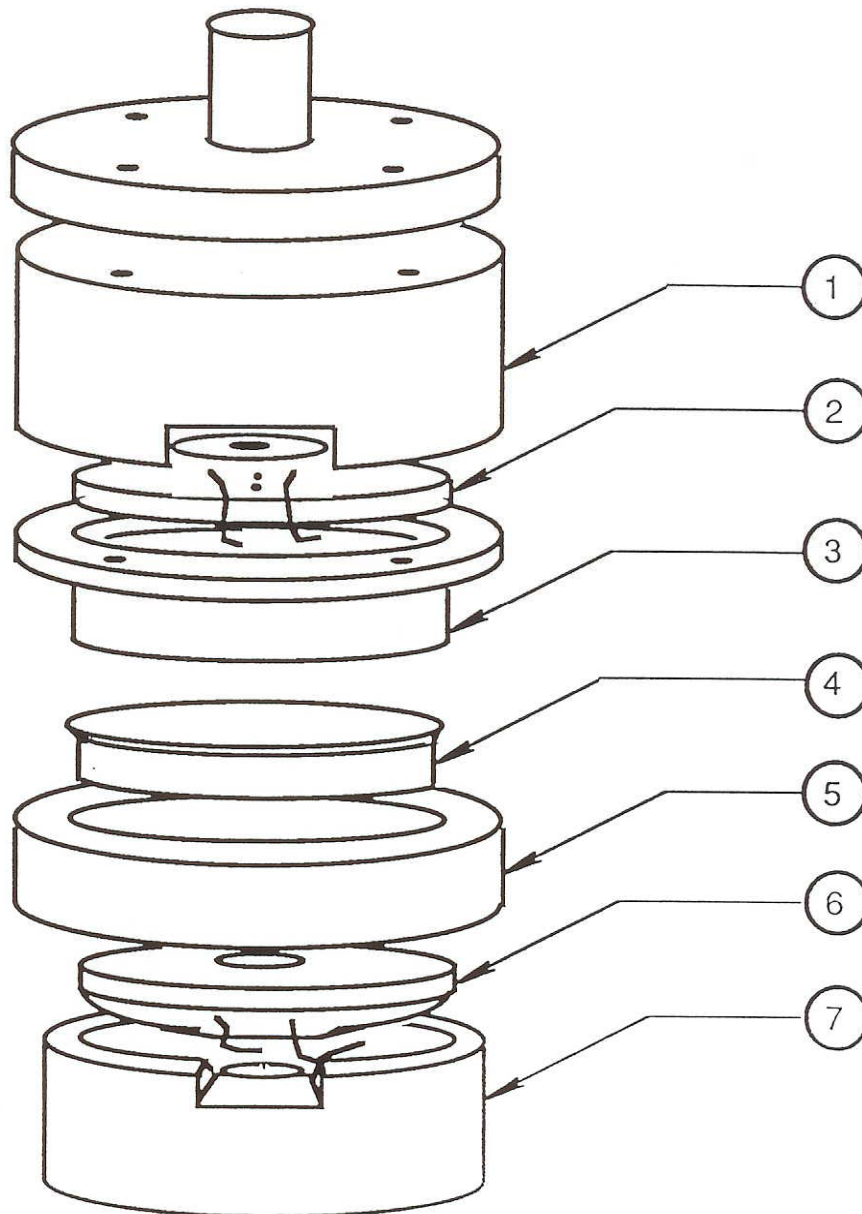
Puffing mold assembly of Lite Energy rice cake machine. (1) insulation block; (2) upper platen heater; (3) upper platen; (4) lower platen; (5) ring mold; (6) lower platen heater; (7) insulation block (Hsieh et al., 1989).
